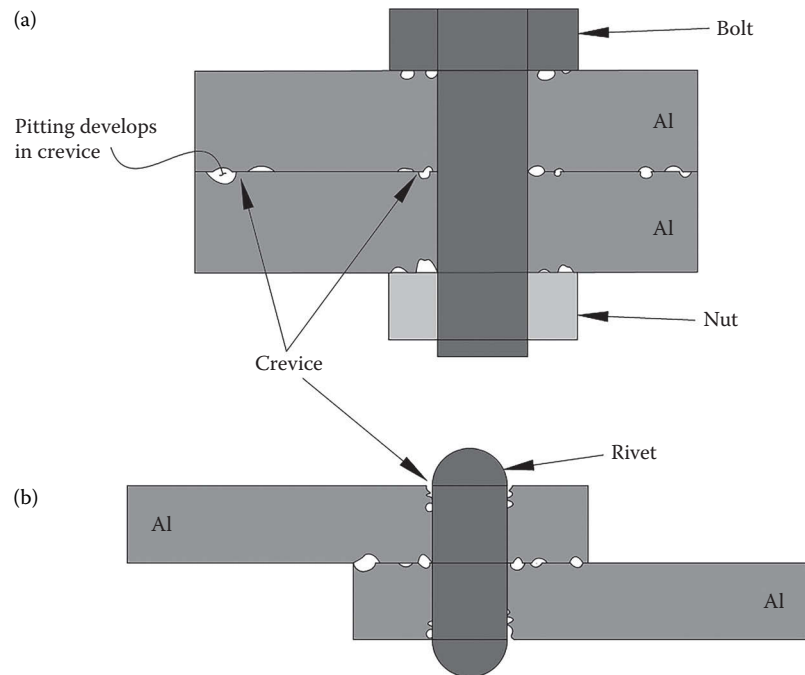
Illustration of typical crevice corrosion: (a) aluminum sheets connected by bolt; (b) sheet connected by rivet
